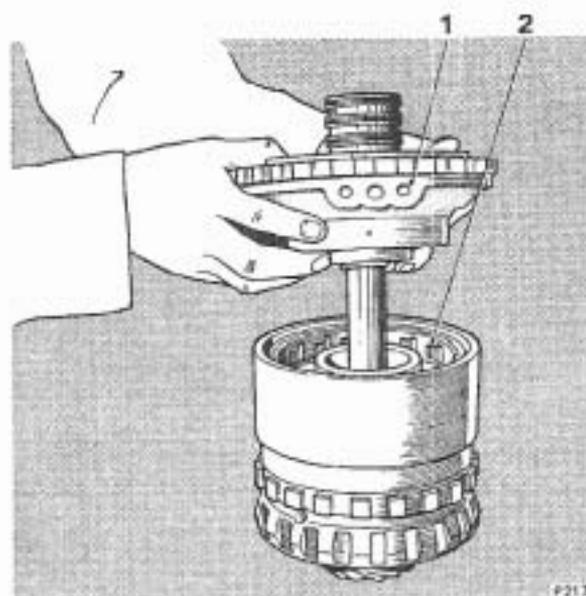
FITTING THE CENTRE SUPPORT INTO THE REACTION CARRIER (ROLLER CLUTCH)
